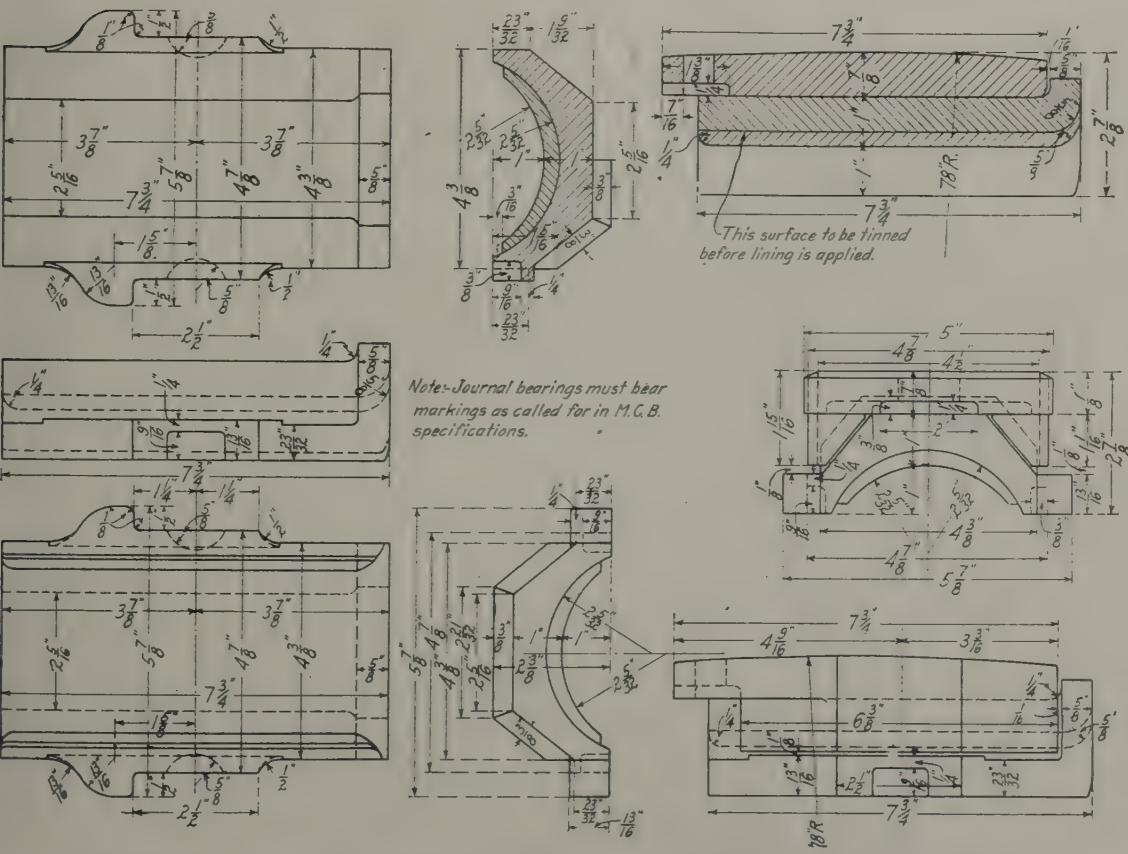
M. C. B. Standard Bearing and Wedge for 4 1/4 in. by 8 in. Journal. (M. C. B. Sheet 6.)
